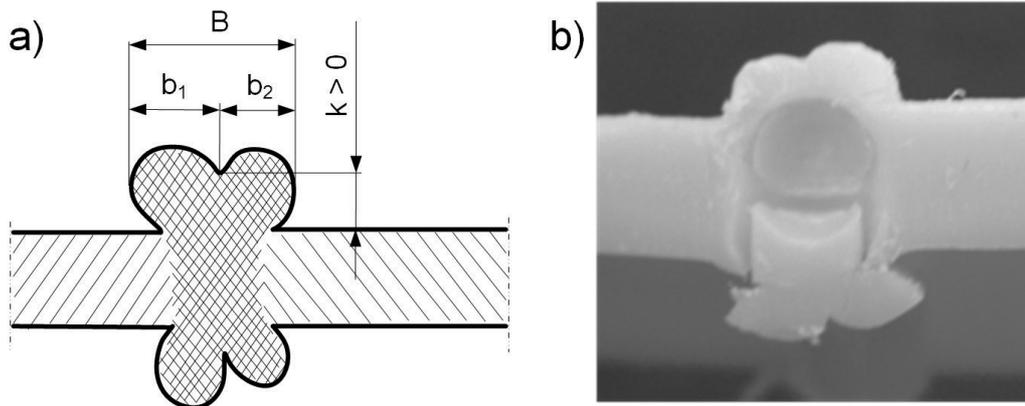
Scheme (a) [3] and the view (b) of the cross-section of a butt welded joint with internal defect; B – joint width, b_1 , b_2 – width of the weld beds, k – groove height between the weld beds
